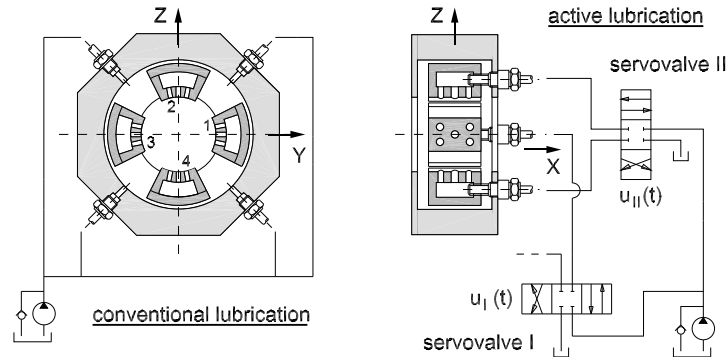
Actively lubricated tilting-pad bearing with injection system.
